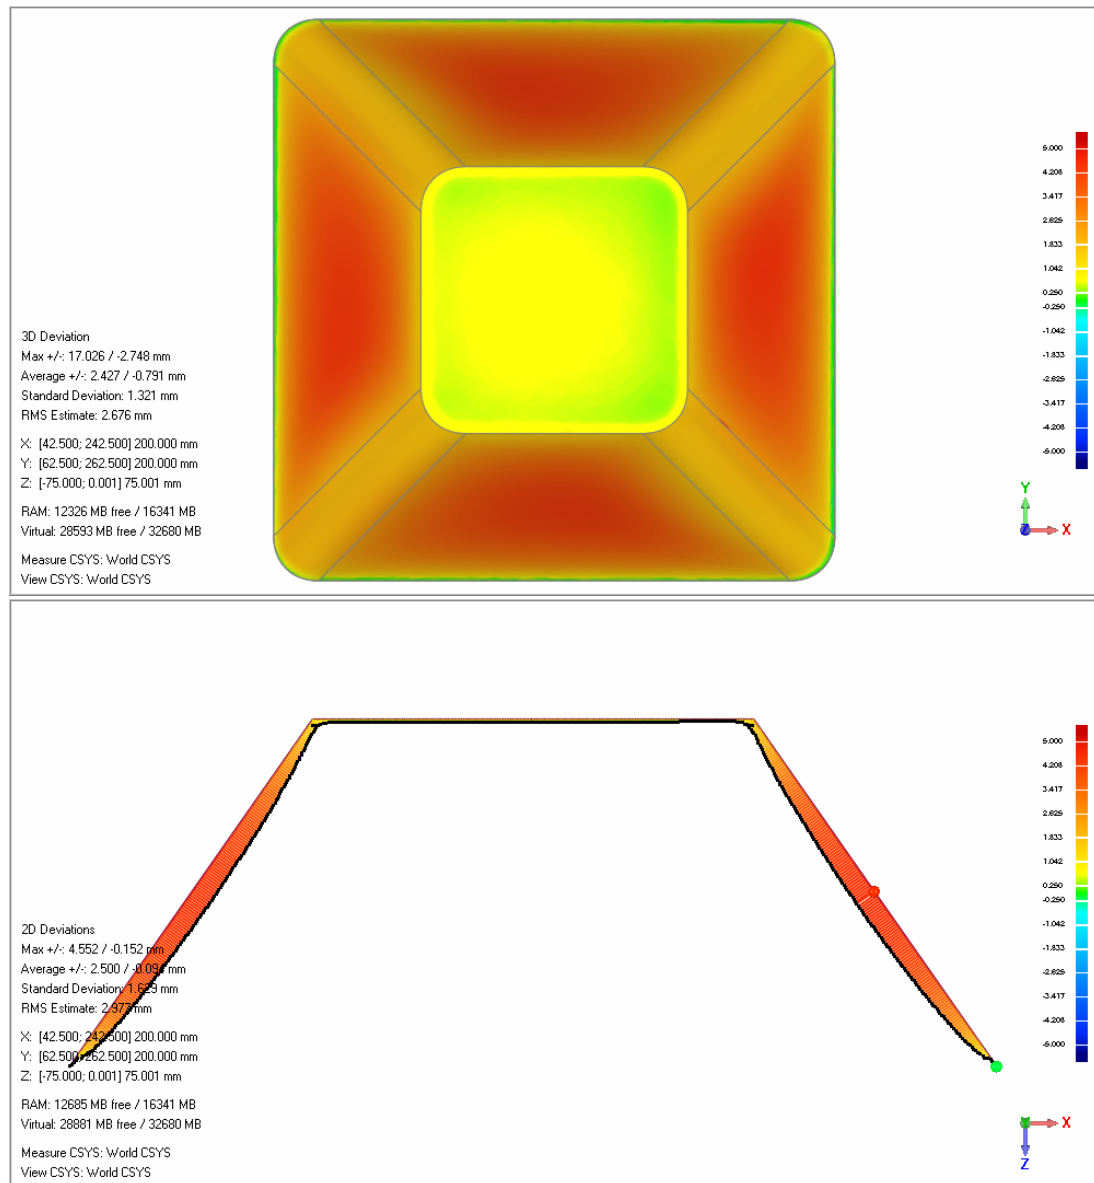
Part T8B geometric accuracy results - top view and cross-section view
